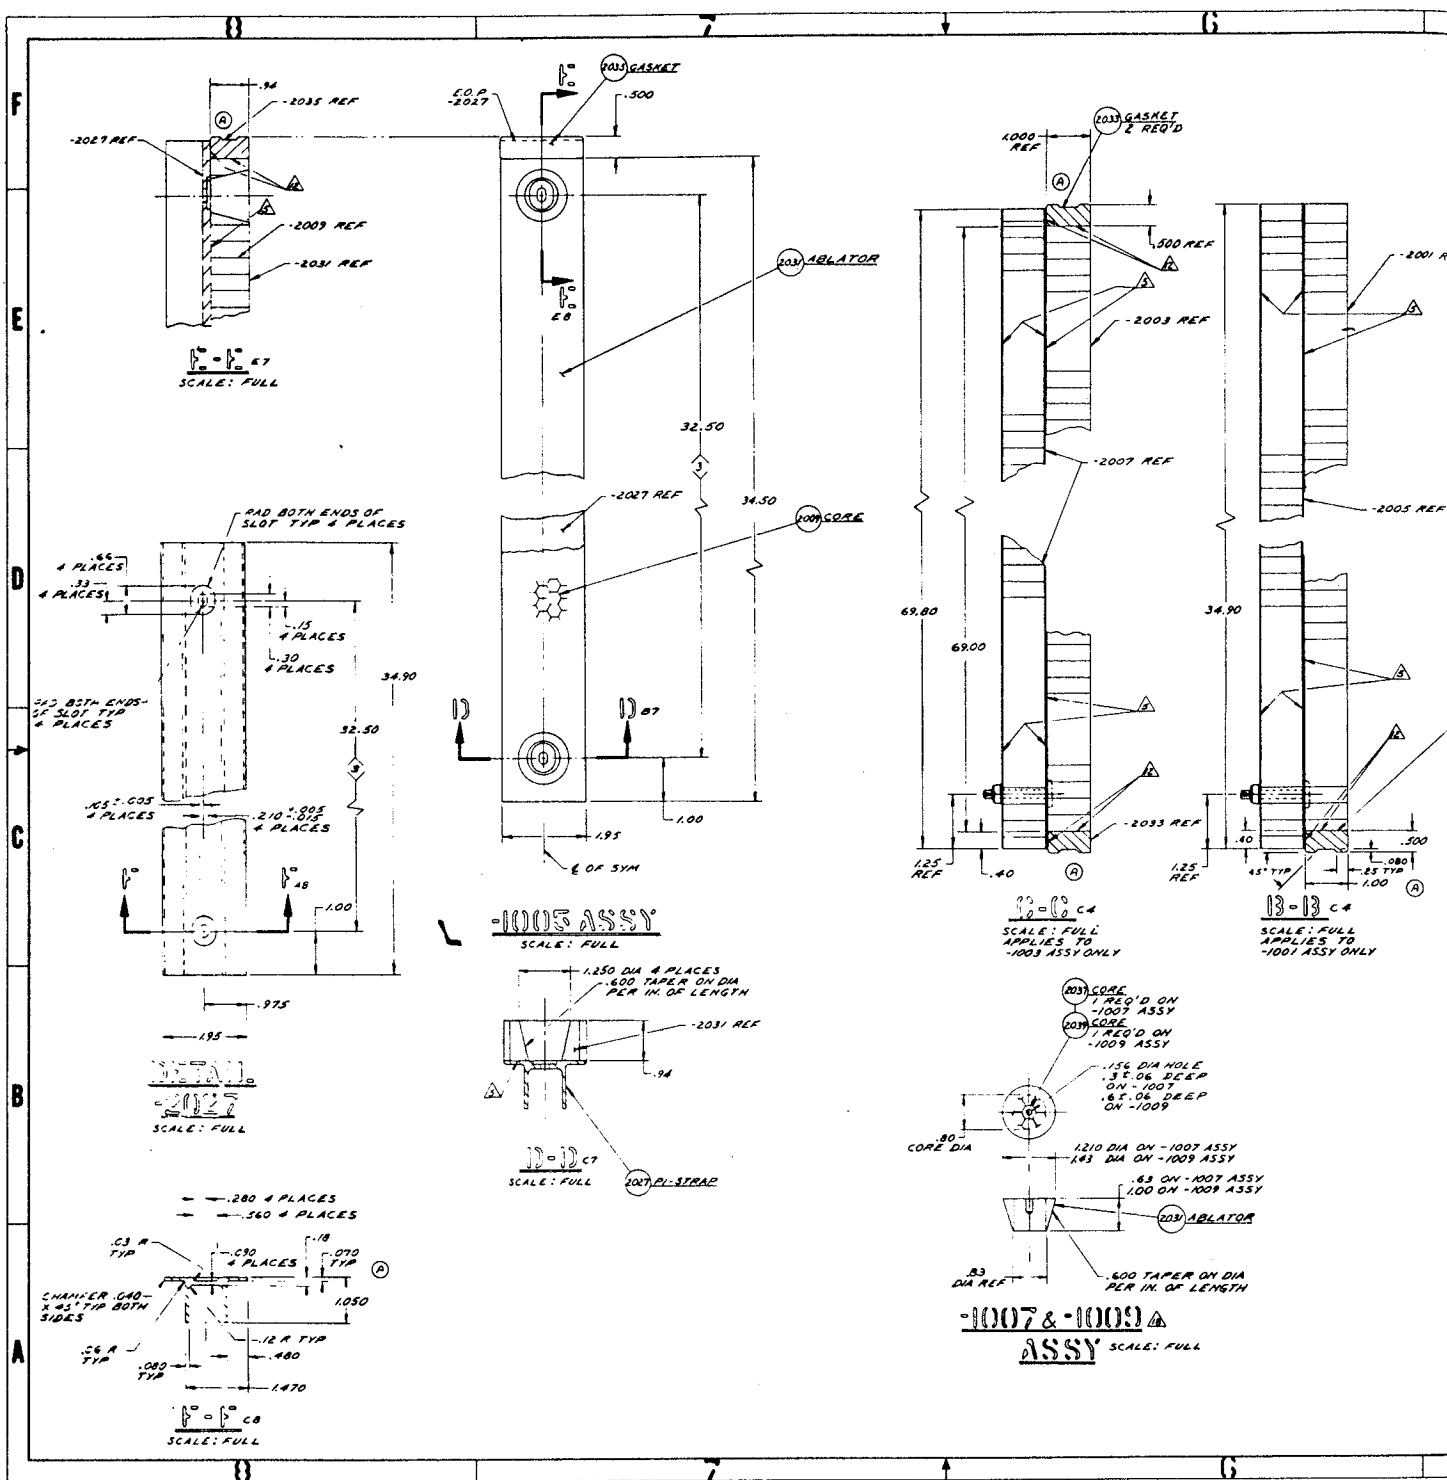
TPS PANEL SUPPORT ASSEMBLY
